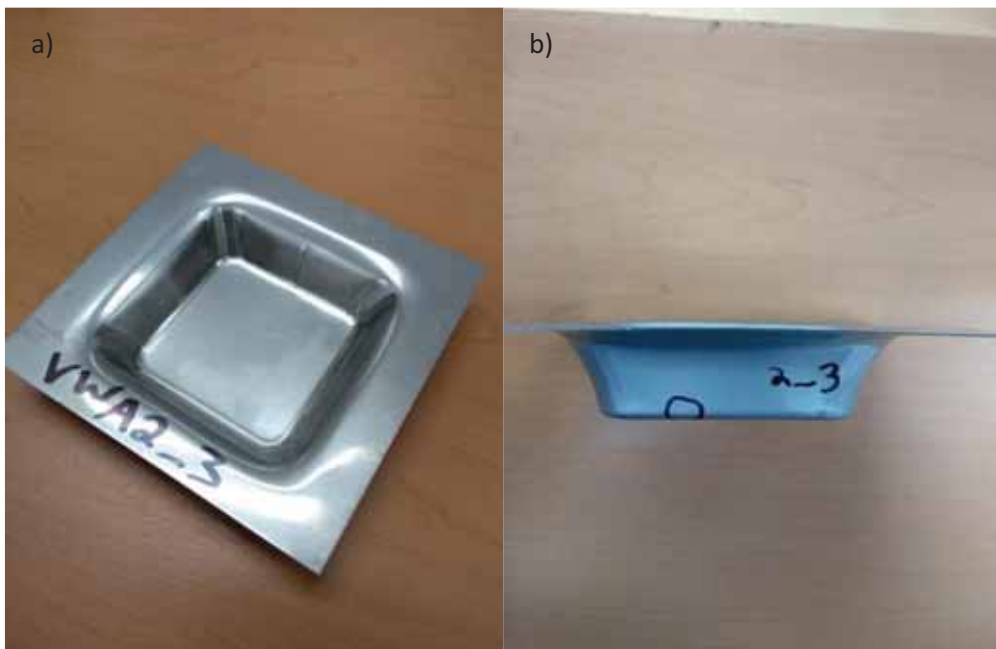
a) Pyramid Frusta B3 b) circled Fracture.
